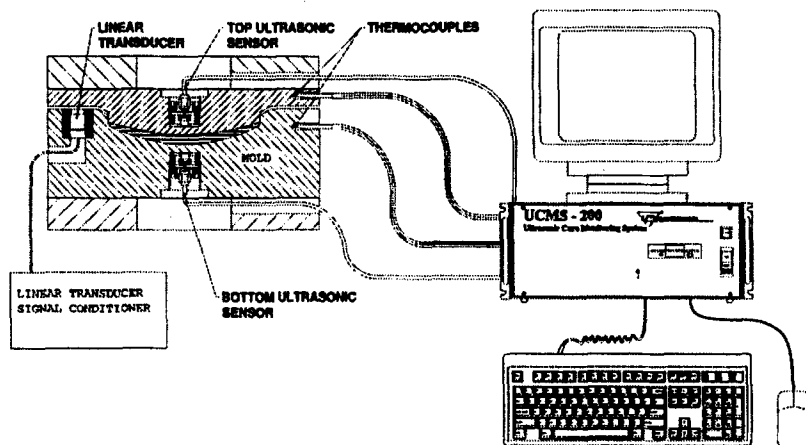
A schematic representation of the UCMS-200 installed in a compression molding process
